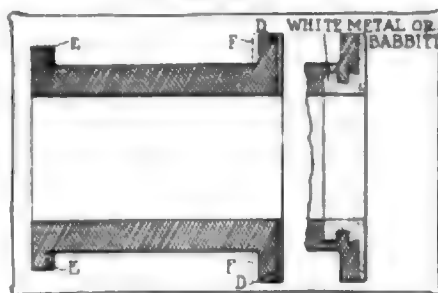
REBUSHING FLYWHEEL-END BEARING
